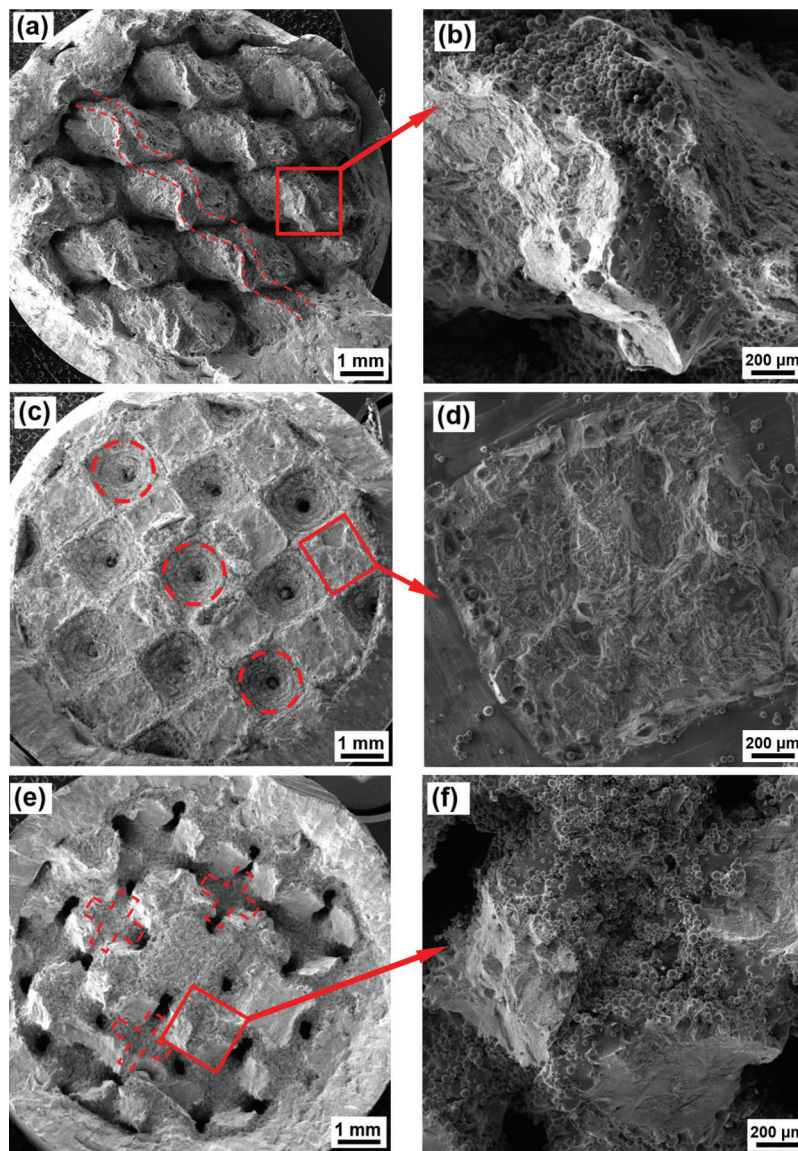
8a, 8c, and 8e show the complete fracture morphology of Gyroid, Primitive, and I-WP porous test pieces. The fracture morphologies of the filled cell in the porous test piece are shown in Figs. 8b, 8d, and 8f. In particular, 8d shows the micromorphology of the unit cell in the corresponding area of the other half of the marked area
